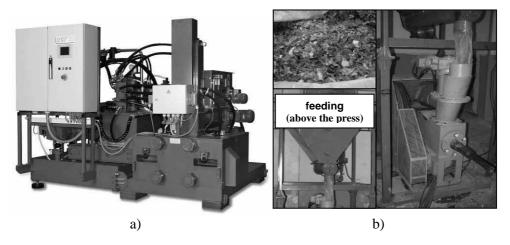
Types of briquetting presses: a) Hydraulic press, b) Mechanical crank-shaft press.
